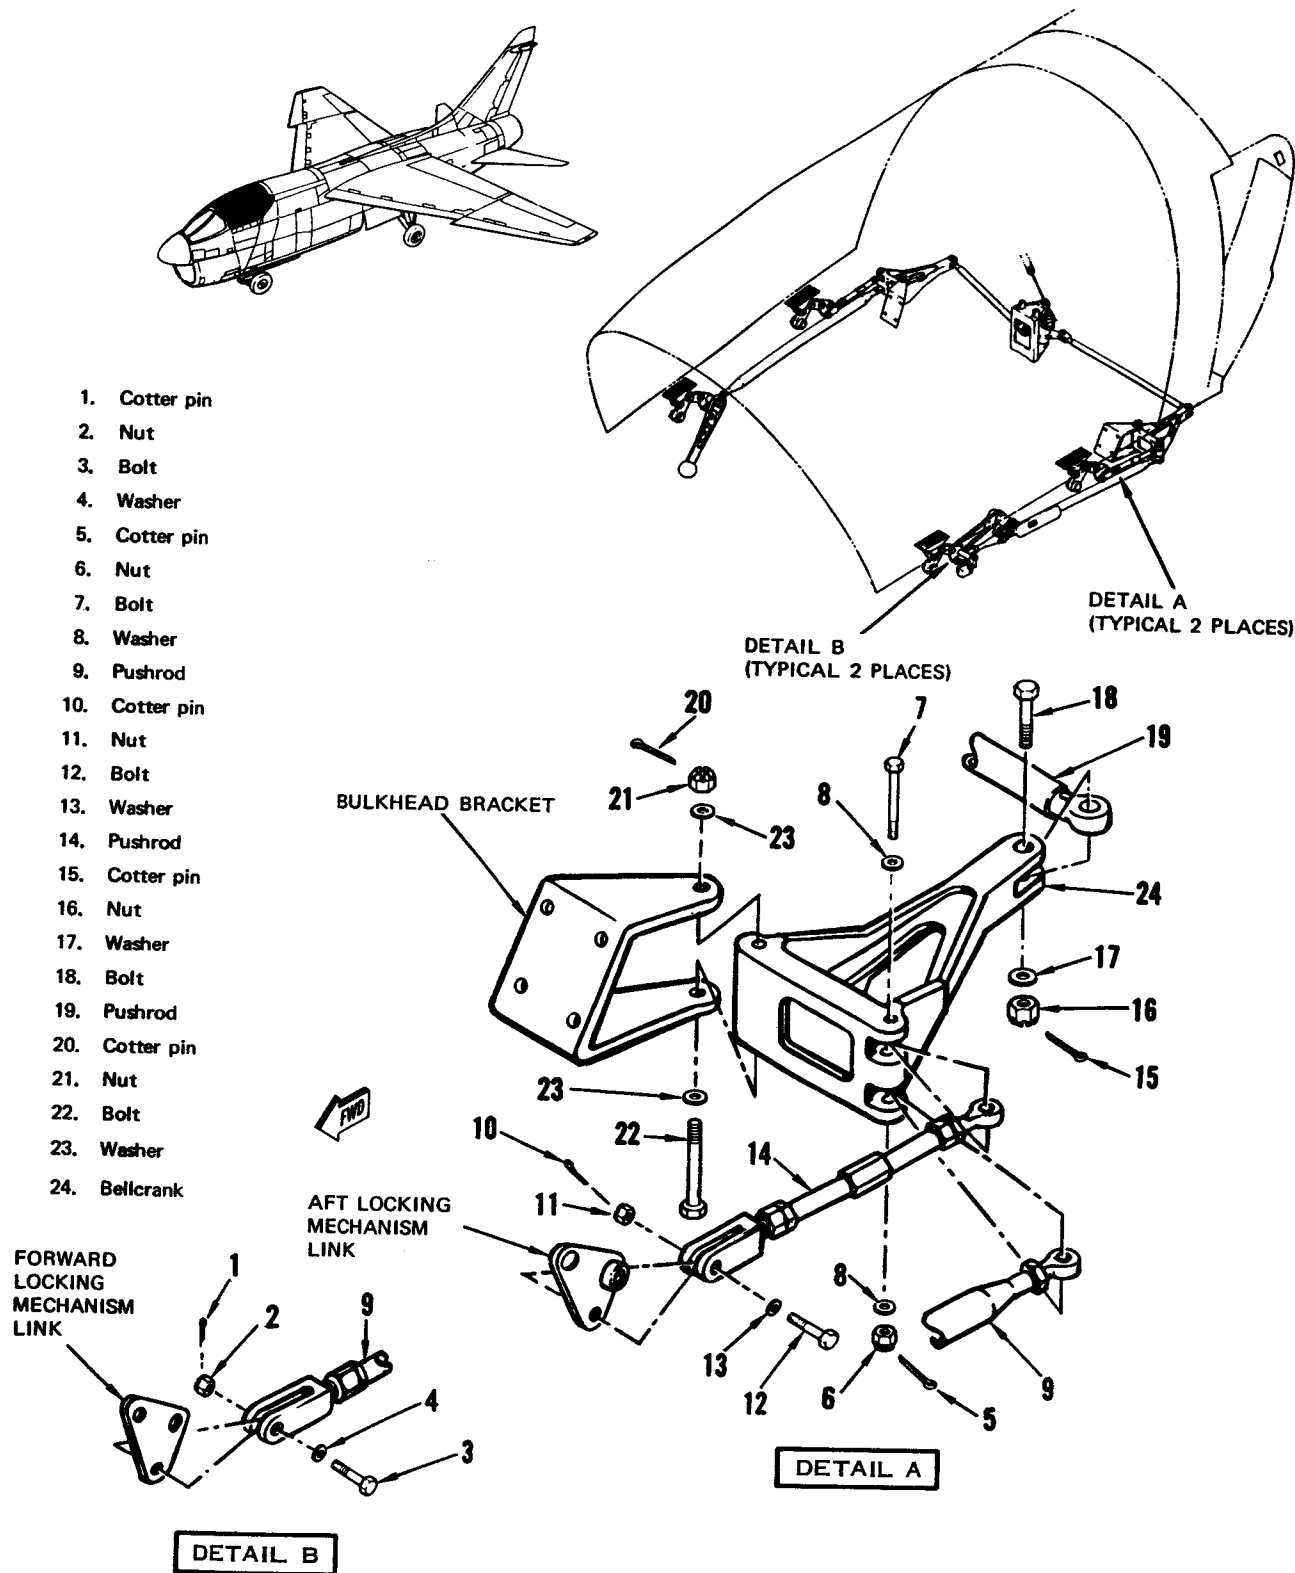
Canopy Release Mechanism Pushrod and Bellcrank Removal and Installation
